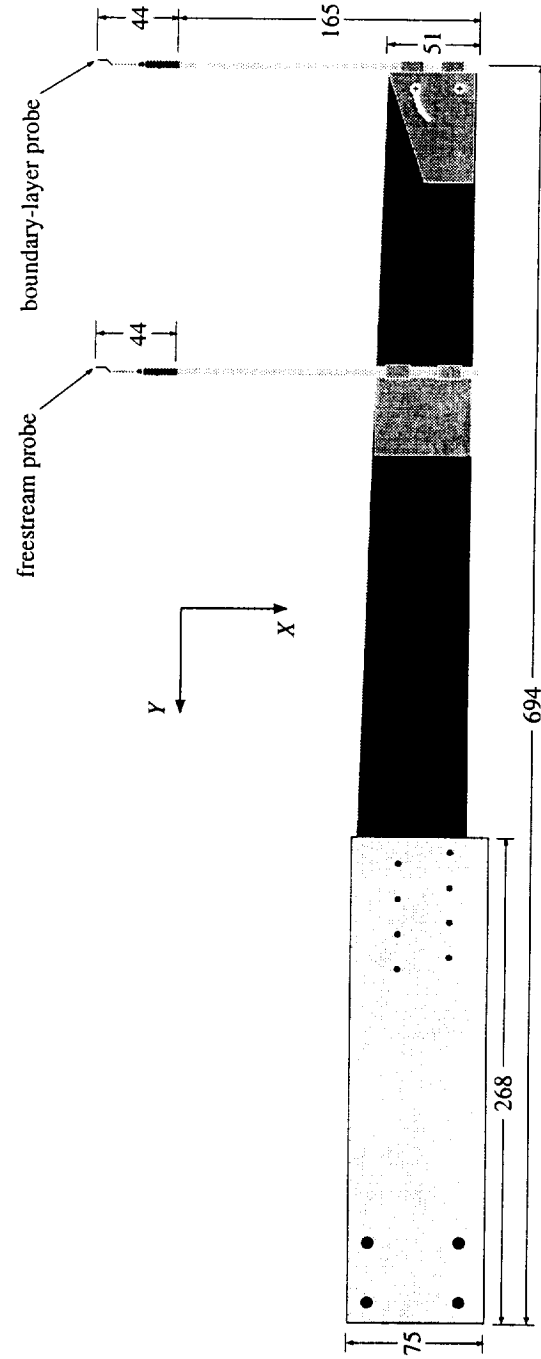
Plan view of hot-wire sting. All dimensions are in millimeters.
